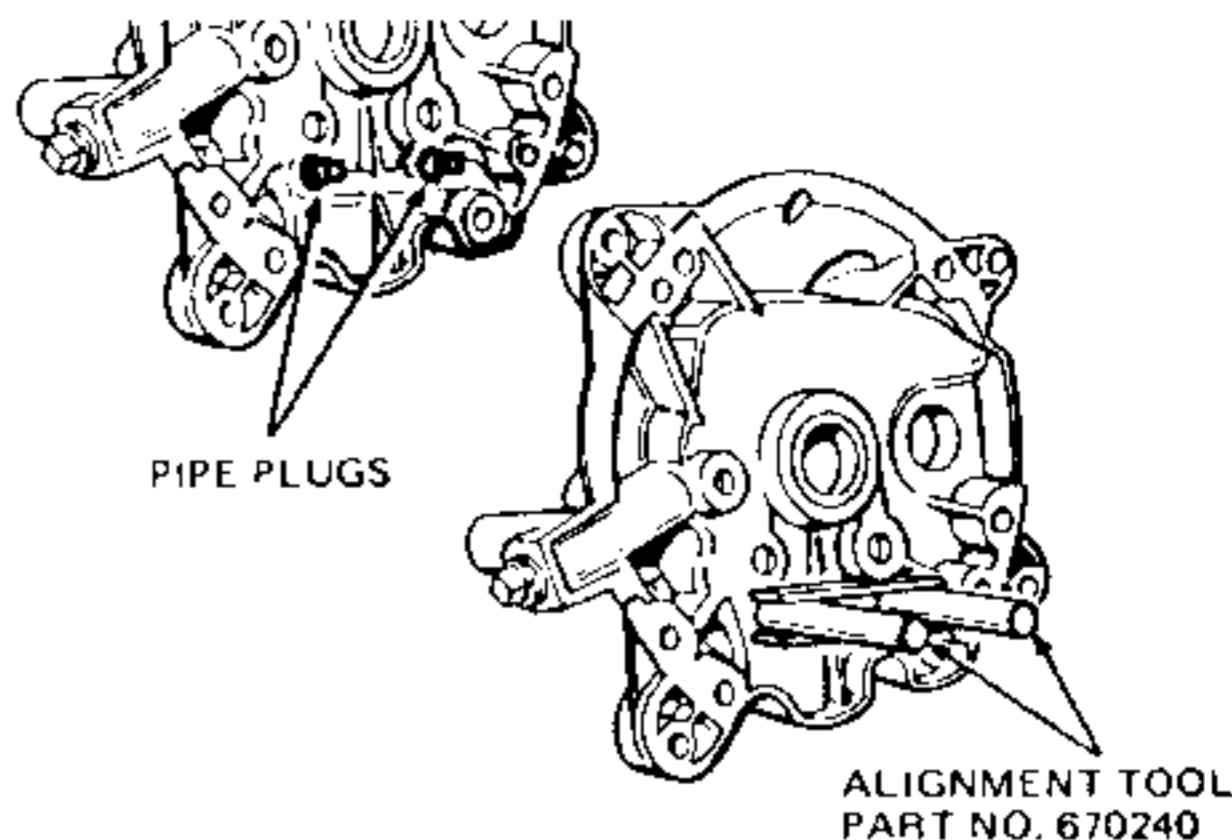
To time balancer gears on Models HH80, HH100 and HH120, remove pipe plugs and insert timing tools #670239 through crankcase cover and into timing slots in balancer gears. Refer also to Fig. T53.
